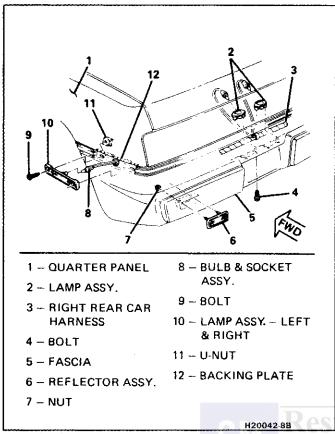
B-6 License Plate and Rear Sidemarker Lights
